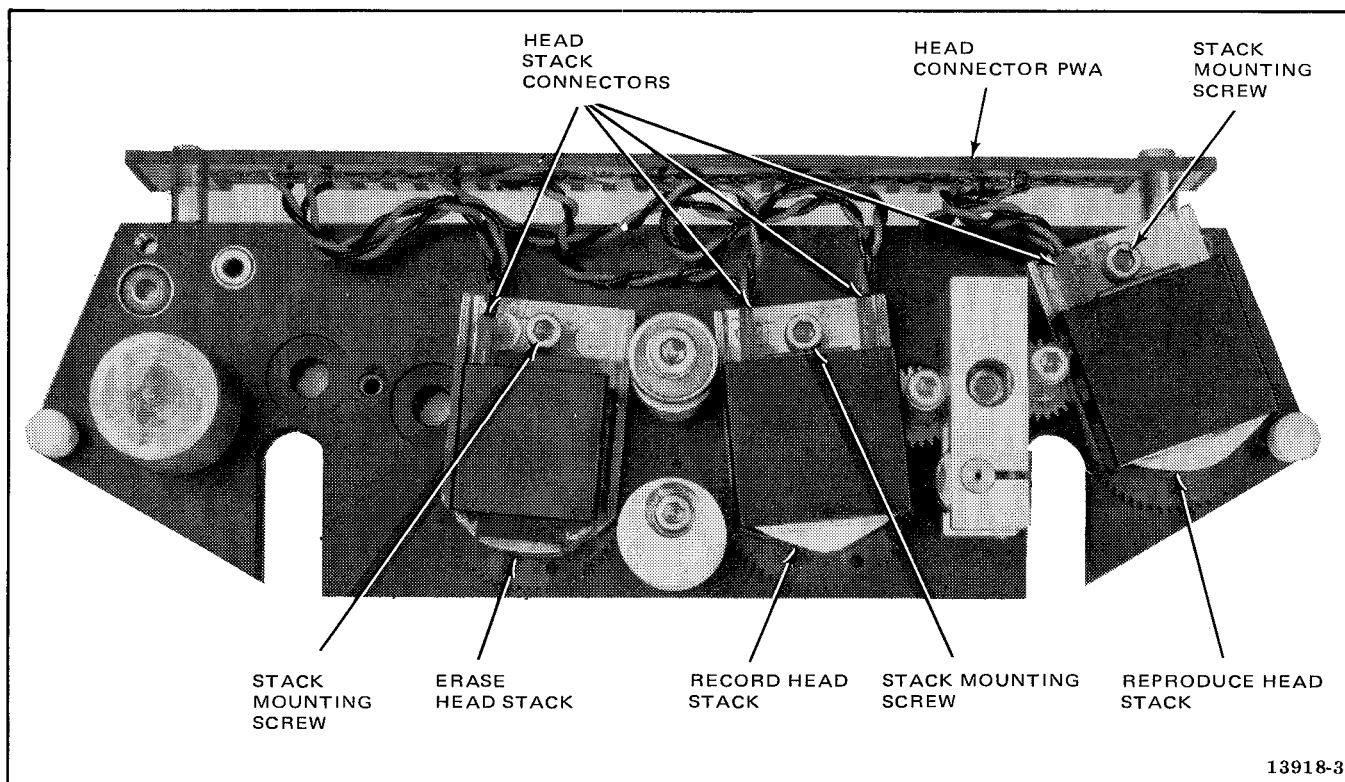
Top View of Head Assembly with Main Head Shield Removed
